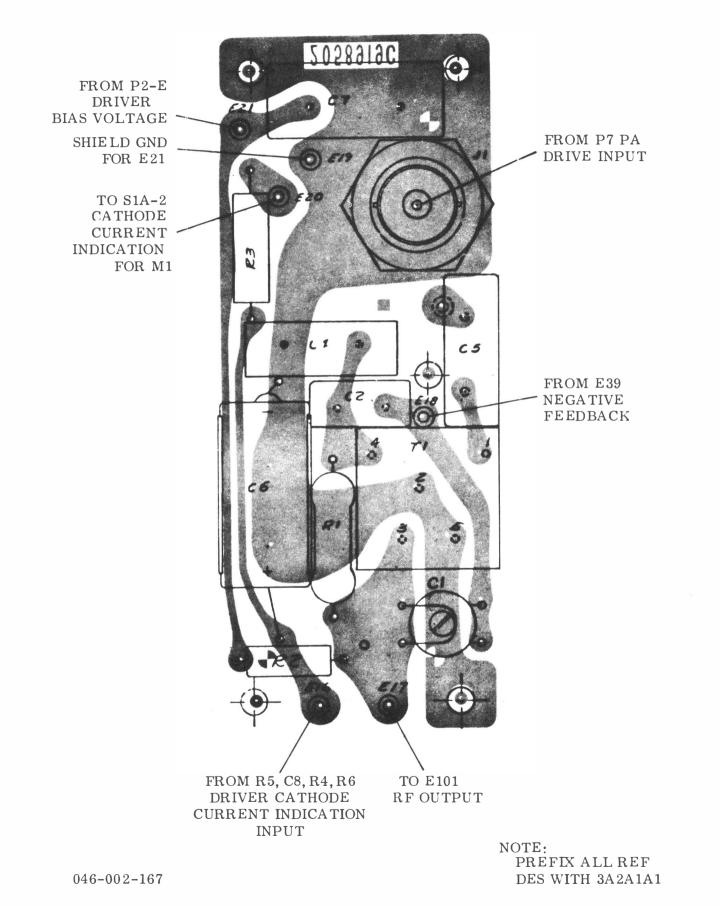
RF Input Bridge PCB (3A2A1A1), Component Location
